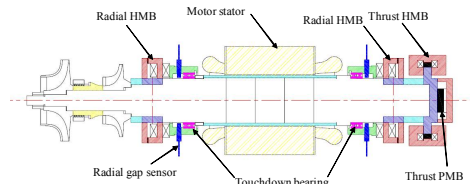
Configuration of turbo refrigerant compressor using radially magnetized ring-shaped magnet
